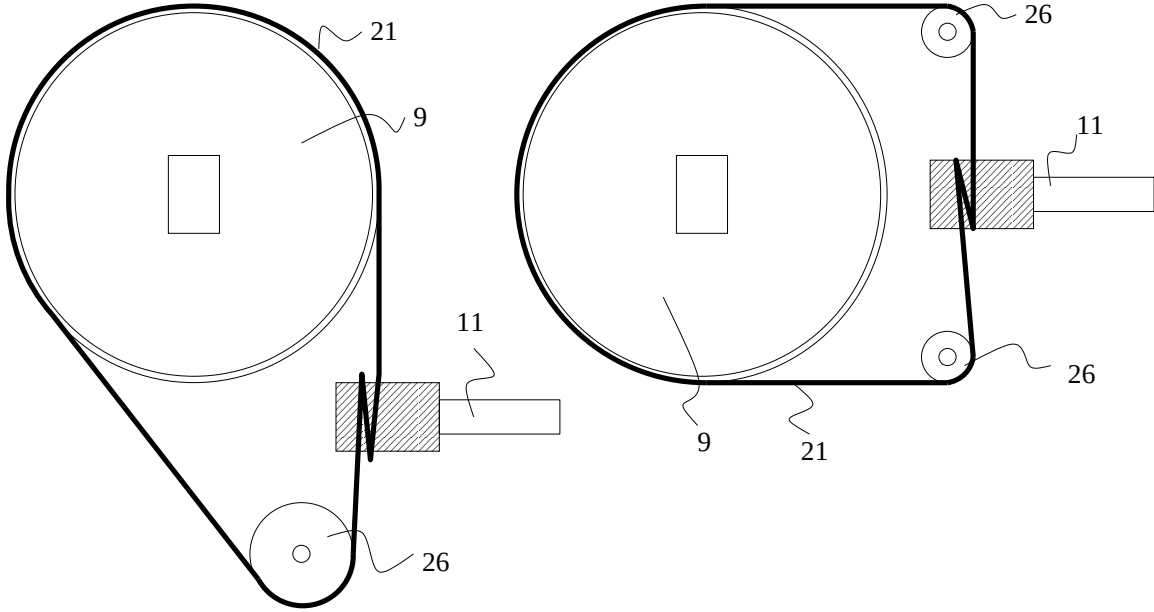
The left hand figure shows the cable configuration used for the elbow-b joint. An extra pulley (26) is used to transfer the cable drive from the motor pulley (11) to the large pulley (9). This allows the motor shaft to be perpendicular to the axis of the joint, freeing up the motor position. A similar organization is used for the wrist-b joint, shown in the right hand figure. Here two pulleys are used to achieve the same effect.
